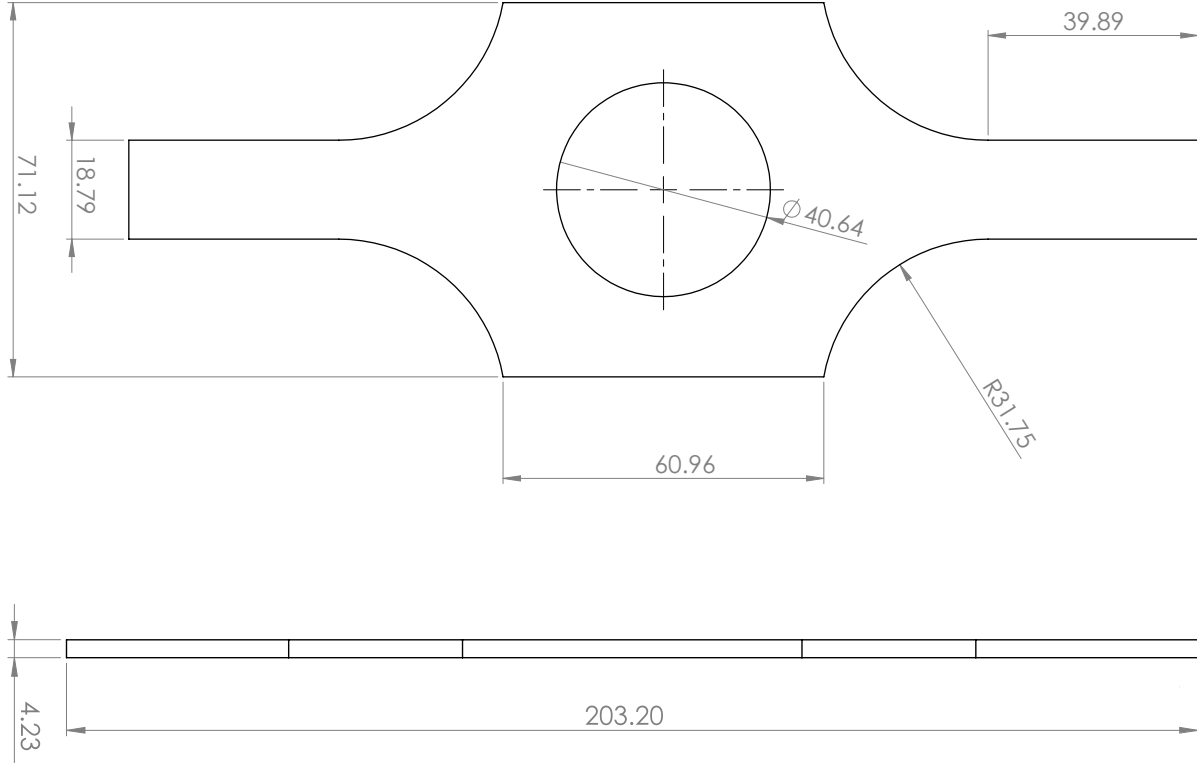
Dimensions of the complex geometry specimen (in mm).
